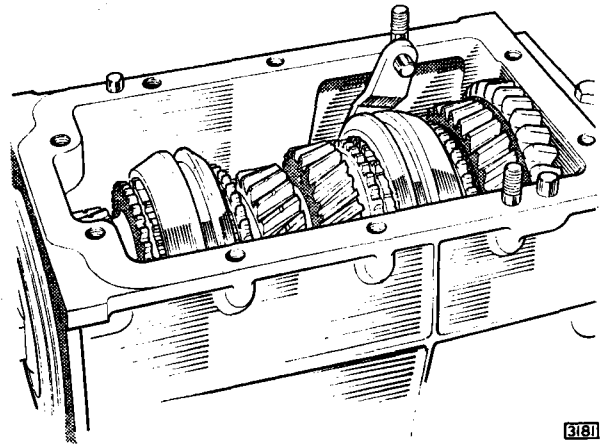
Re-assembled gearbox prior to refitting of top cover.
